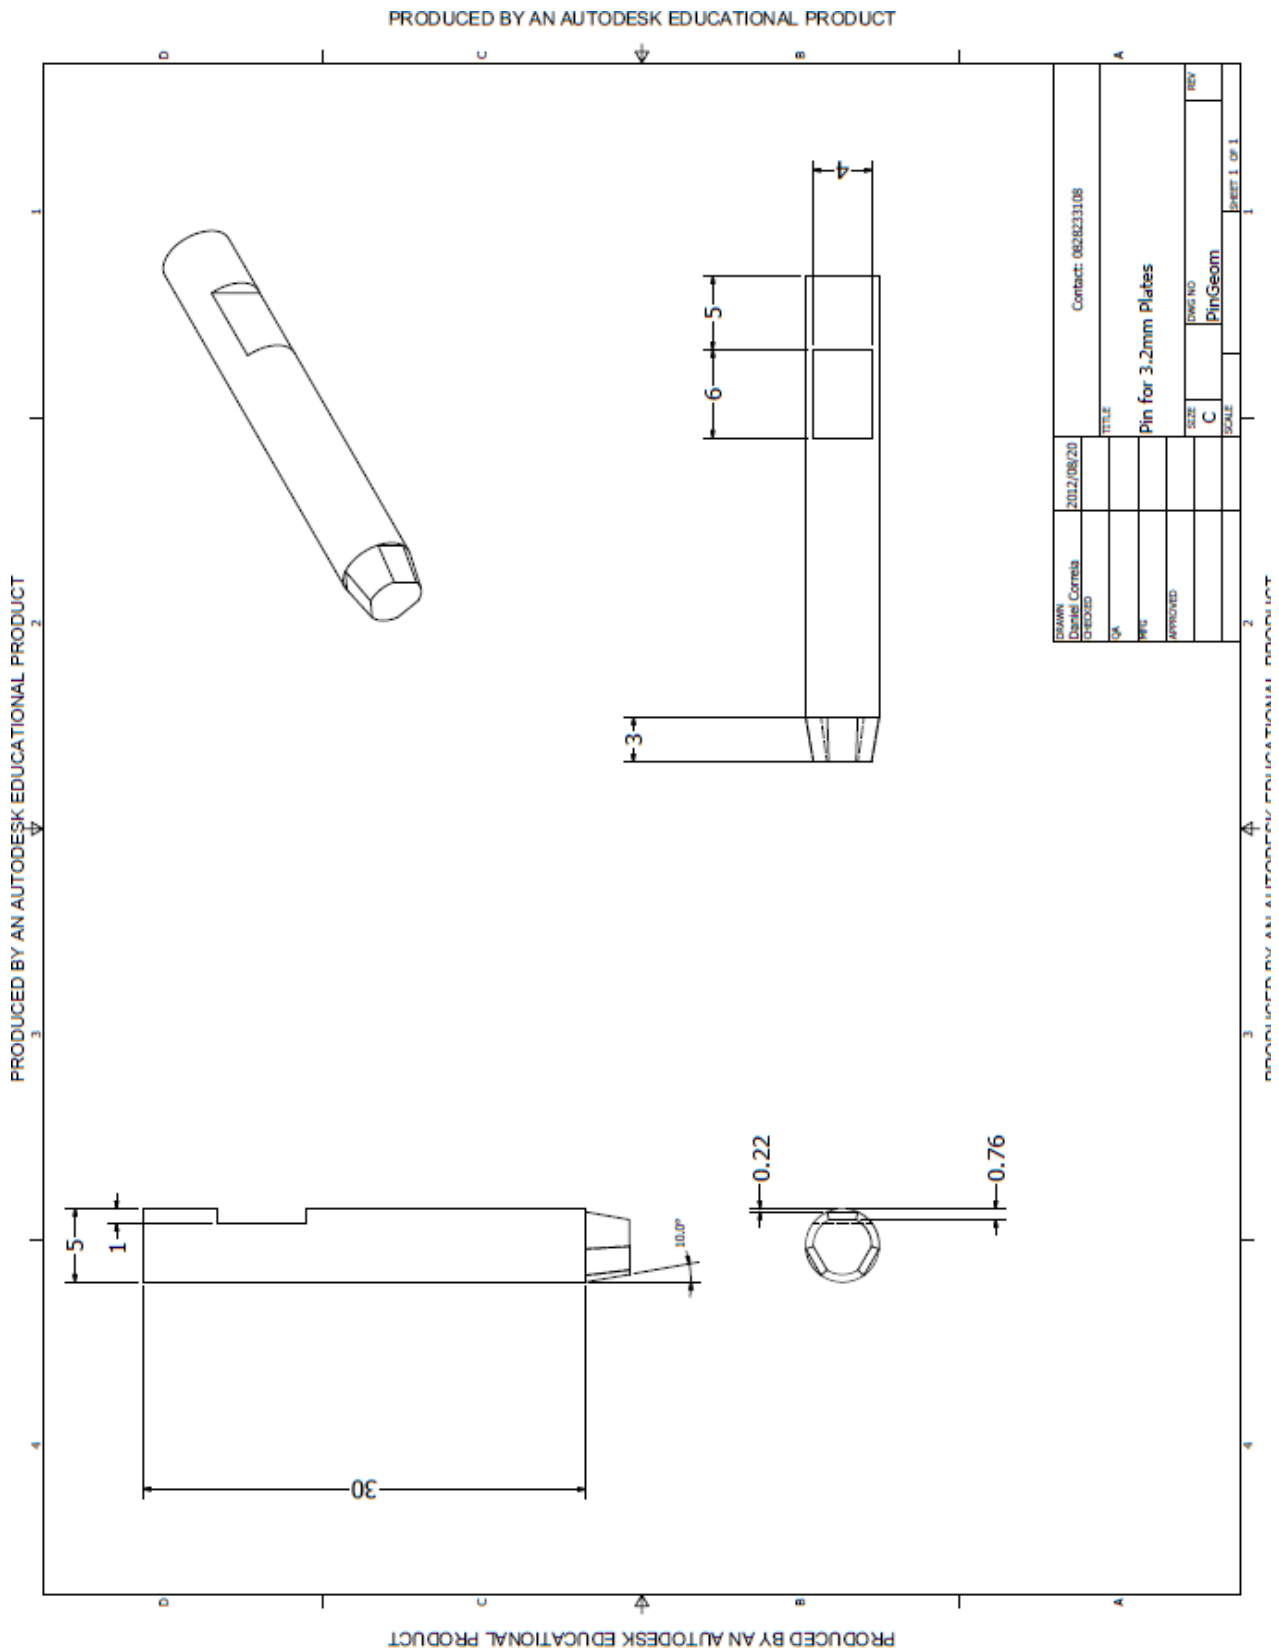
Engineering Drawing of Welding Pin
